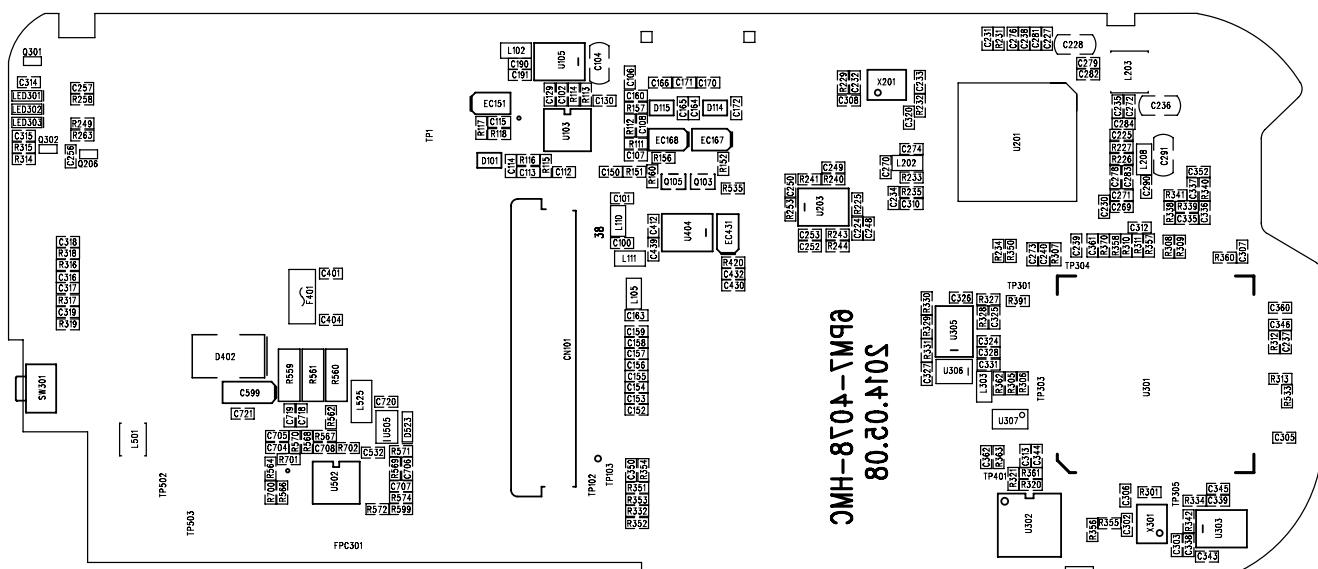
TP660 Main Board Top Side PCB View (136-174MHz)
